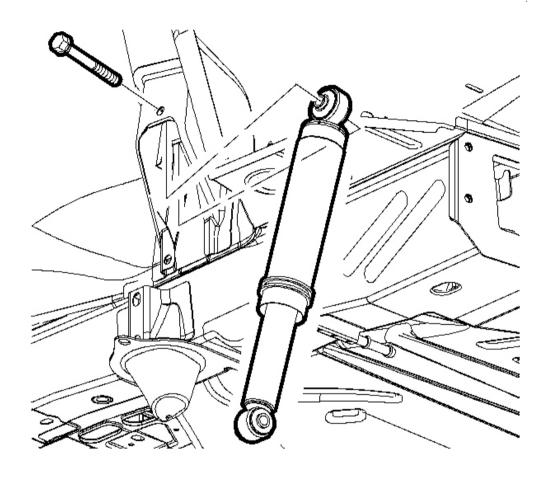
Upper Shock & Bolt Courtesy of GENERAL MOTORS CORP.
